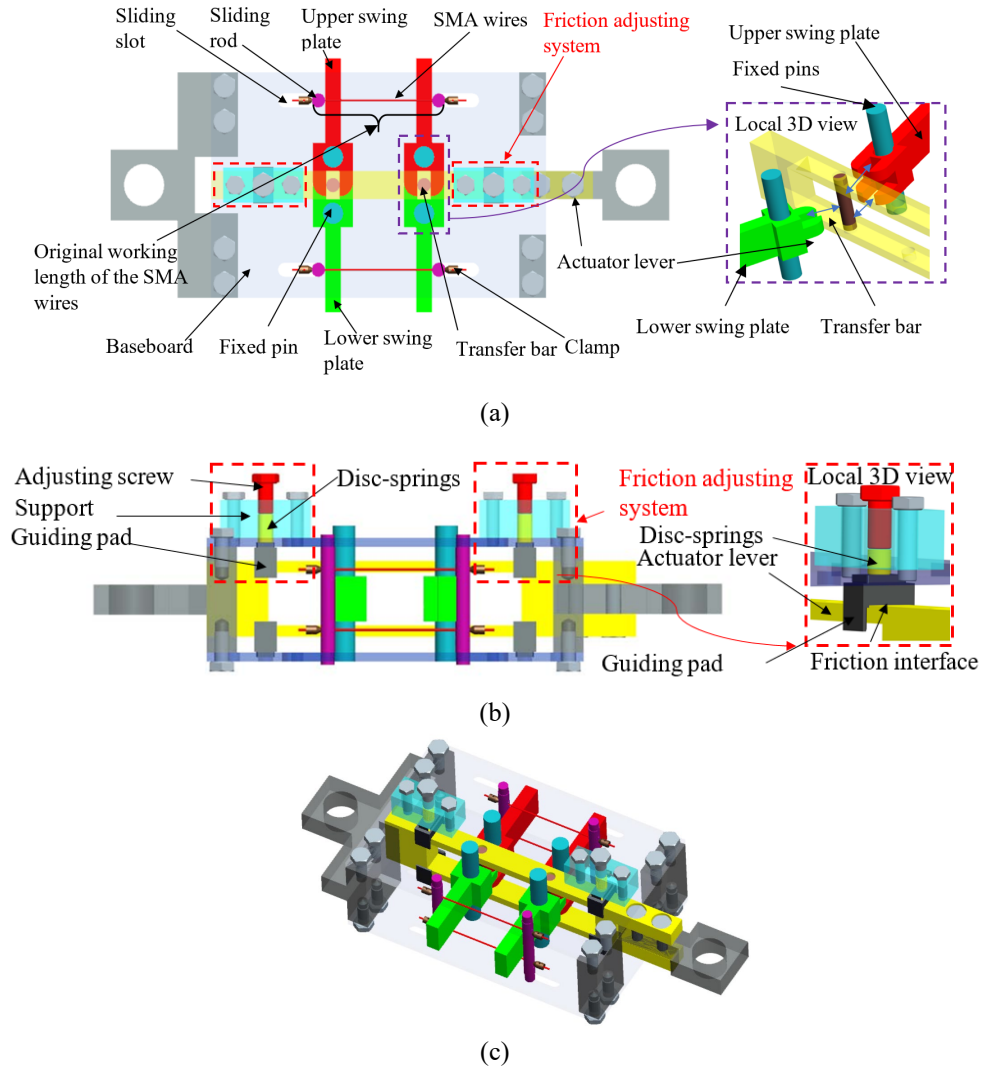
2D and 3D sketches of the DASMAFD: (a) front view, (b) top view, (c) 3D view
